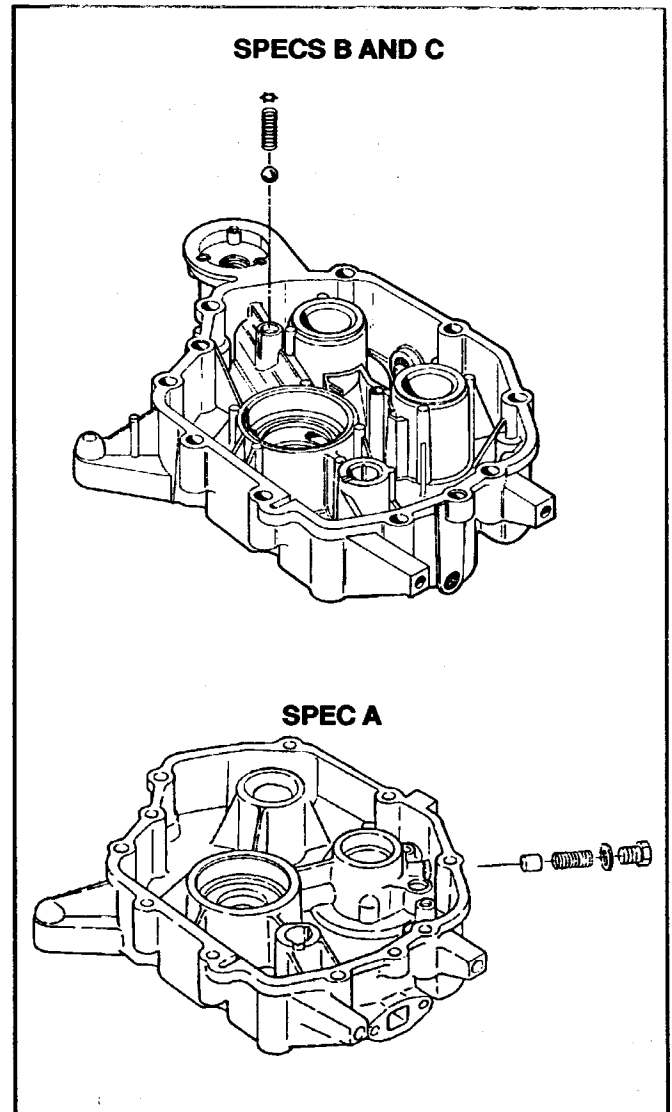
OIL RELIEF VALVE COMPONENTS
